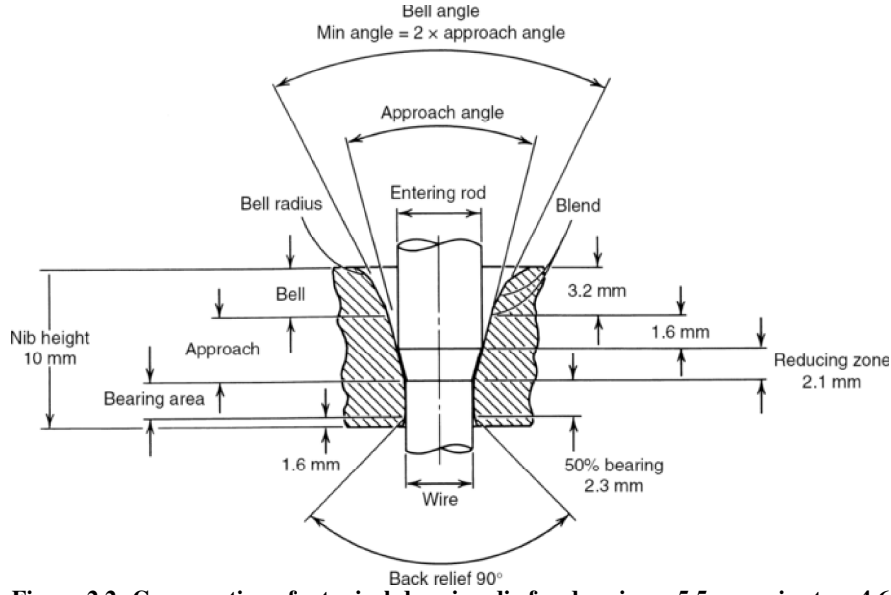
Cross-section of a typical drawing die for drawing a 5.5 mm wire to a 4.6 mm wire [2].
